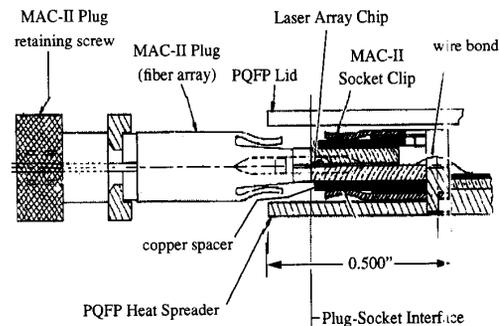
1D-ODL packaged transmitter module to MAC-II connector (cross-sectional edge view).
